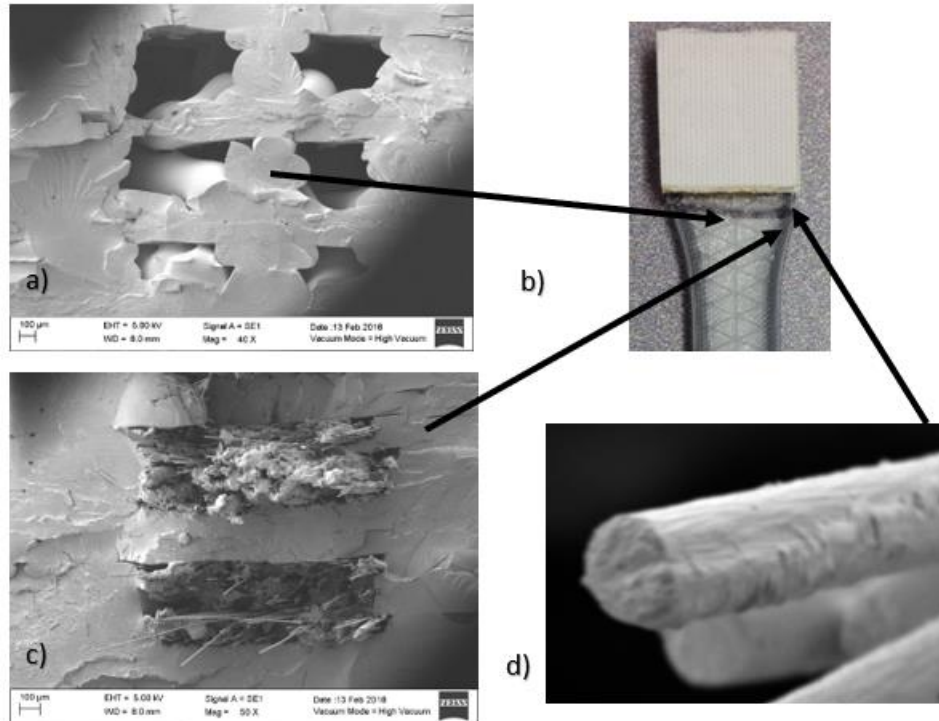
Outside Fracture mechanism a) Nylon area section b) Specimen fractured c) Single carbon fiber, d) Fiber reinforced area section.
